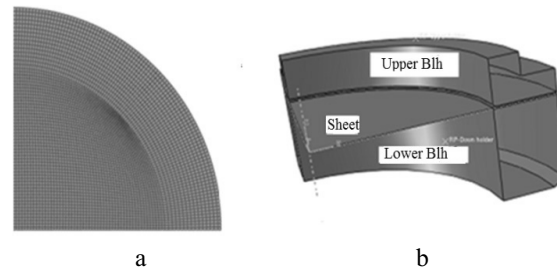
a) A quarter of the sheet in mesh mode, b) Electromagnetic sheet free forming assembly.
